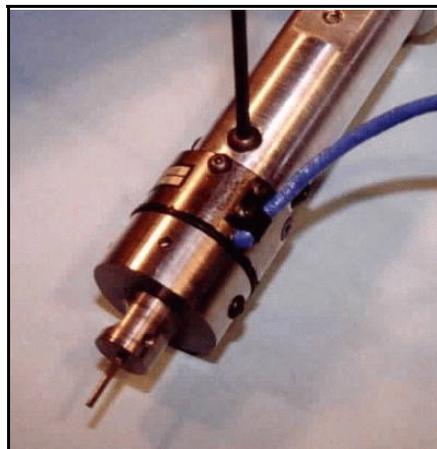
Securing the Part # T1LLM413 Compliant Bushing (front) (Left and Right Sides use part # T1LLM413)
